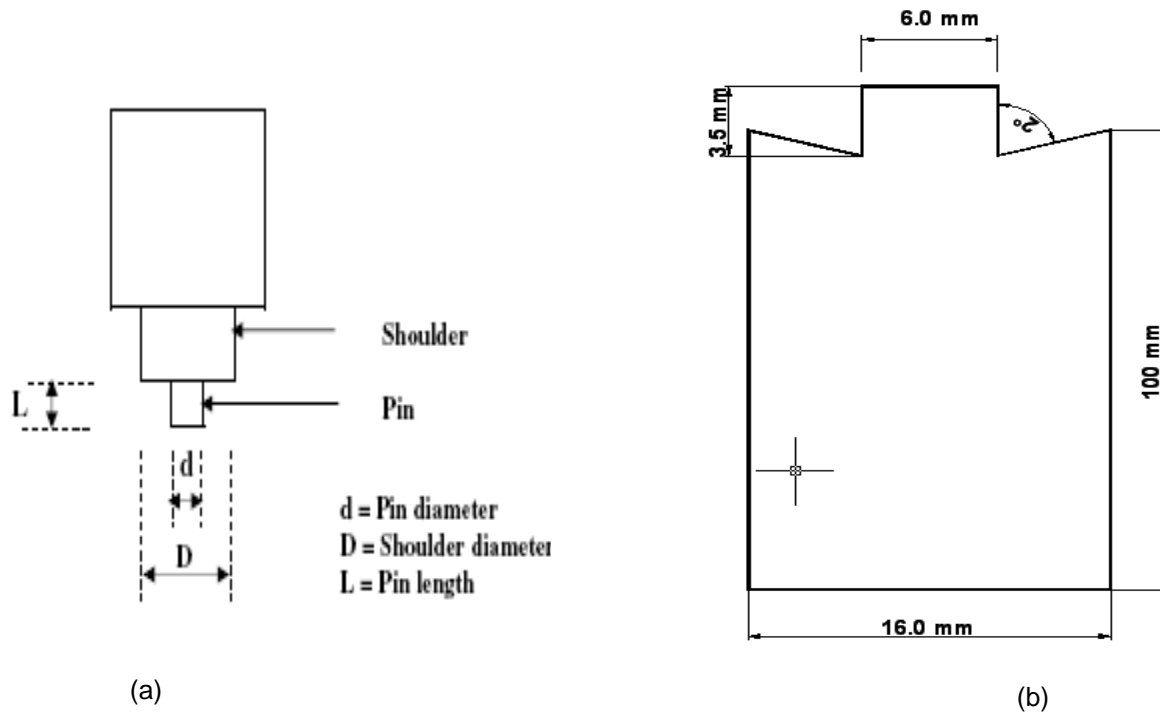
Tool geometry with shoulder surface profile used in FSW process.
